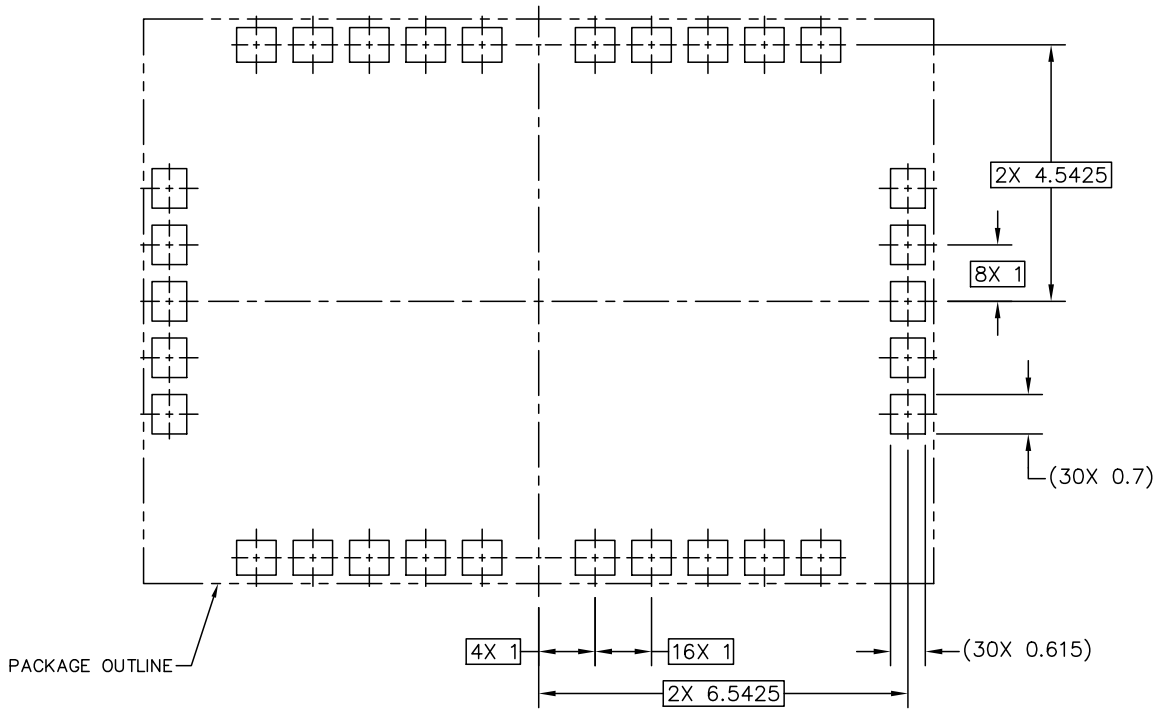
Package outline (14 mm × 10 mm Module) — bottom view, detail E
